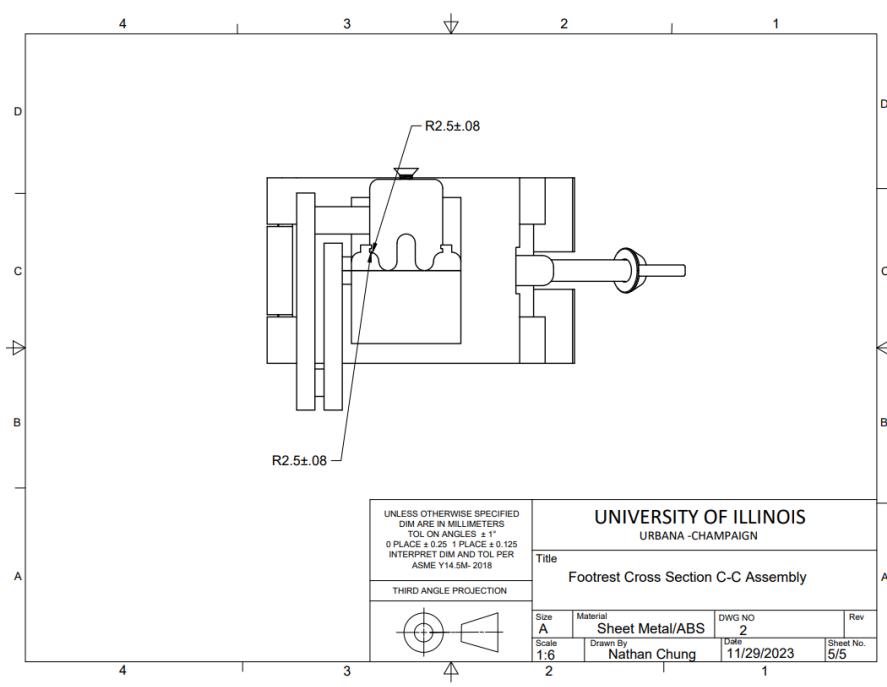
Cross Section View Slider Pan and Rail Drawing and Dimensions
